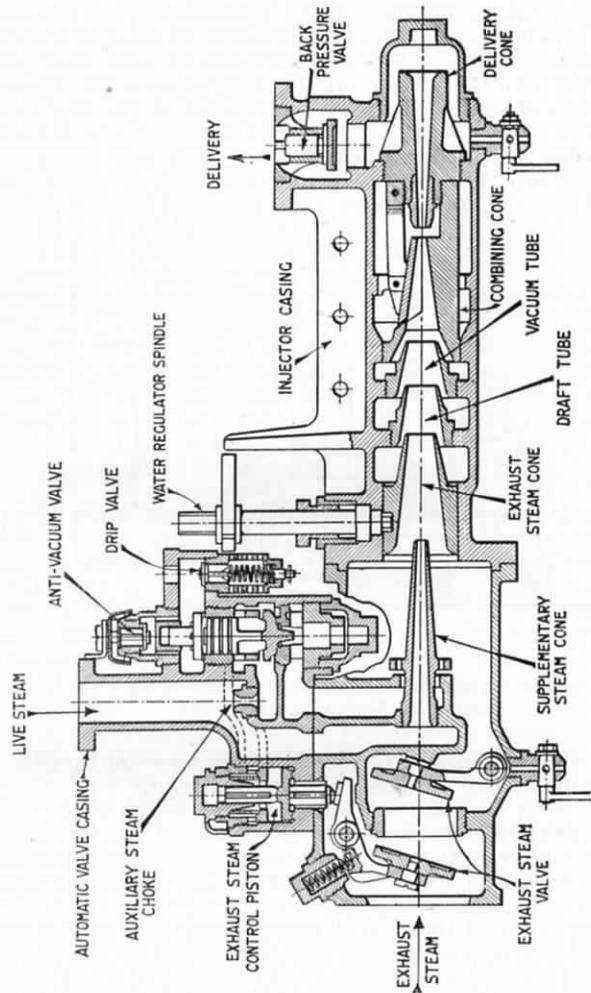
SECTION THROUGH EXHAUST-STEAM INLET AUTOMATIC VALVES AND INJECTOR NOZZLES.
